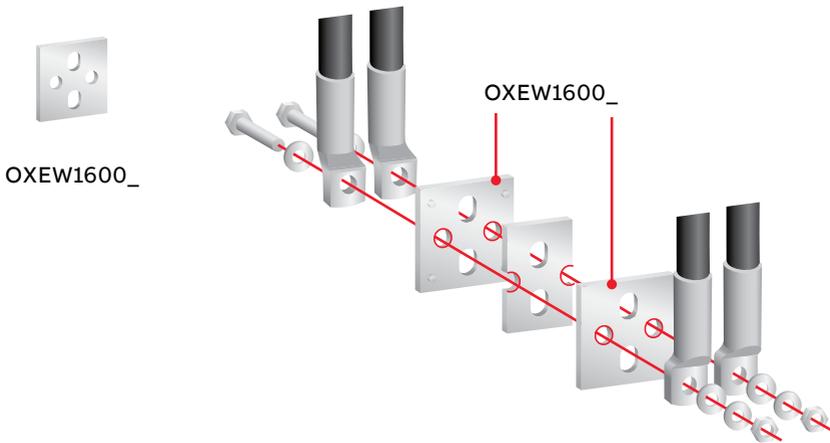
For OX_800U...3200 is needed the terminal busbars, type OXEW1600_, for connecting the cable lug. The busbars have to be mount on both sides of the load side terminals. Tightening torque and bolt size, see the table 8.4
